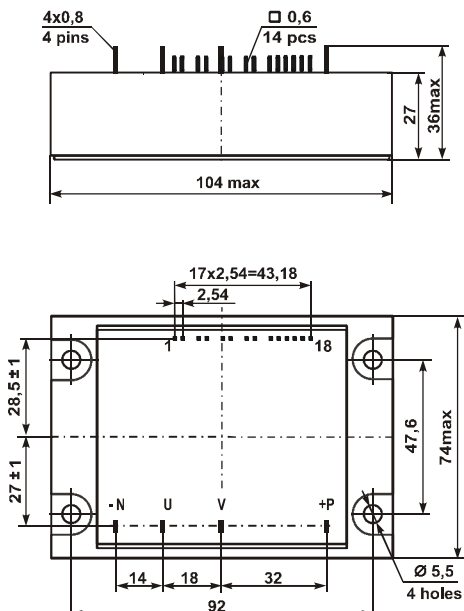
Overall drawing of modules M13B-10-6(12)
